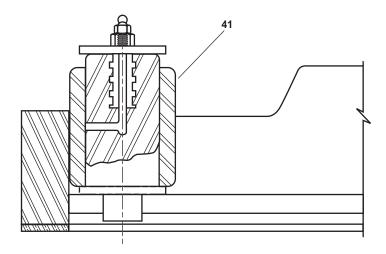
Hydraulic Watertight Doors (Sheet 9 of 9)
